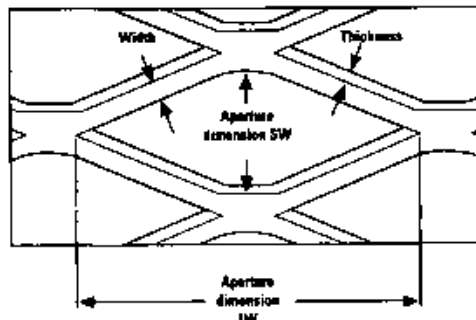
Defining the dimensions of expanded metal meshes. (Illustration: The Expanded Metal Co. Ltd.)
